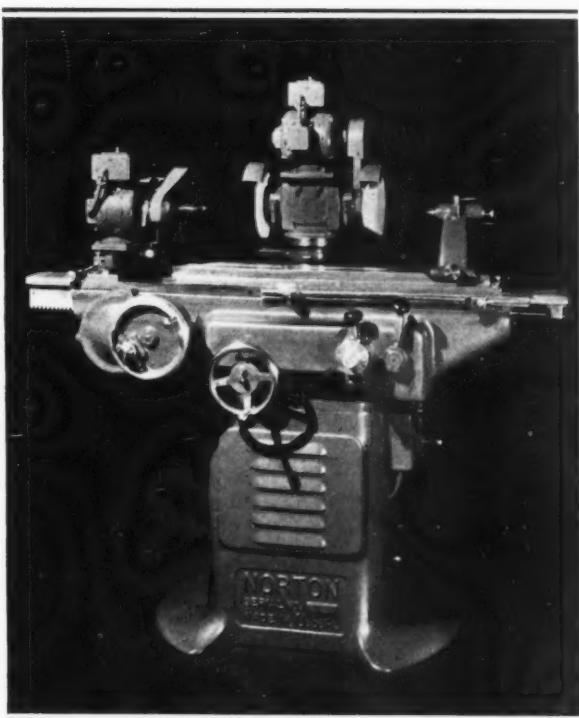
Universal Tool and Cutter Grinder with a Hydraulic Table Traverse
